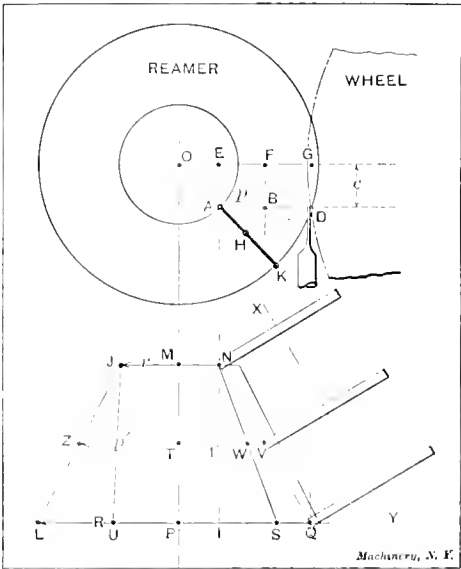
Diagram for Calculating the Error Involved when grinding a Taper Reamer by Method shown in Fig. 1.
